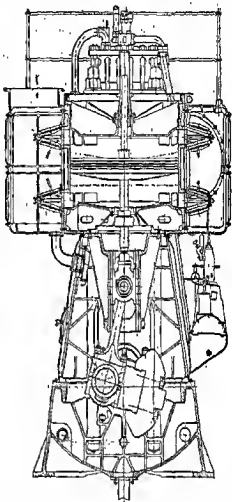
Engine-driven double-acting scavenging pump as used on Nordberg engine.
